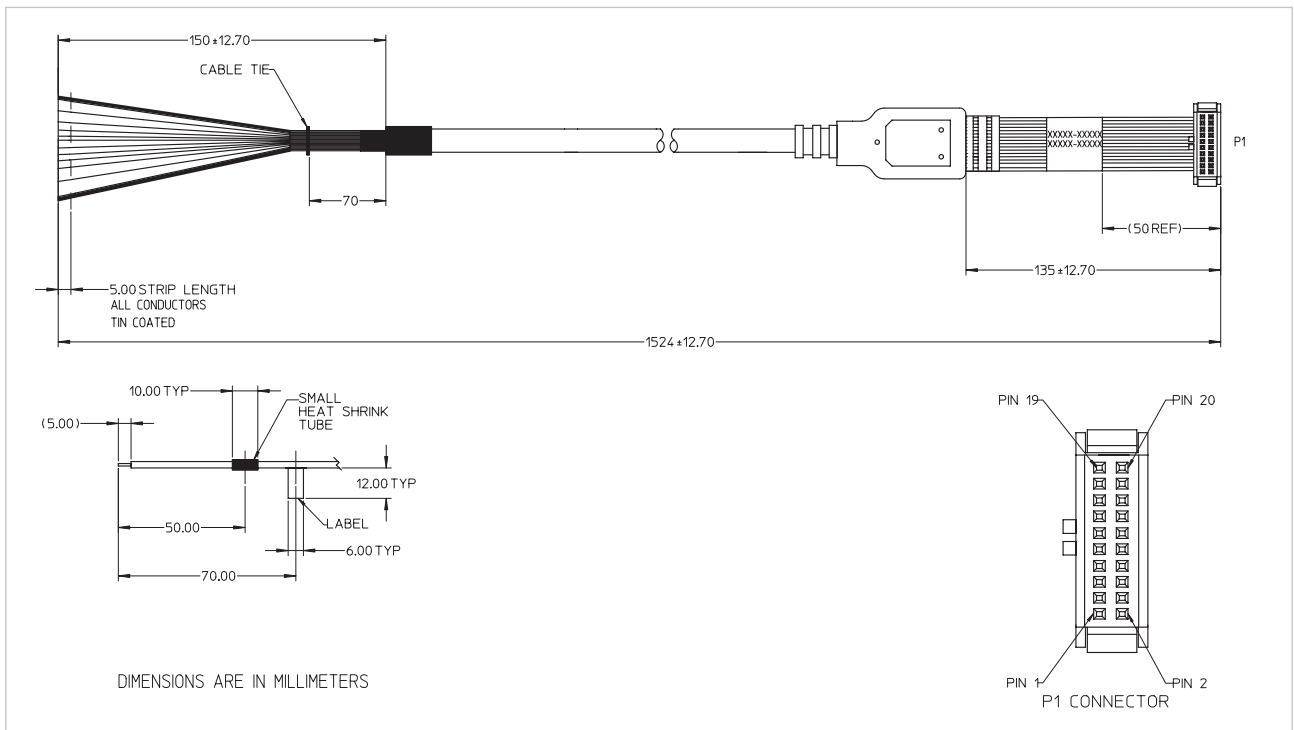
Option 201 - 20 pin to bare wire interface cable assembly
